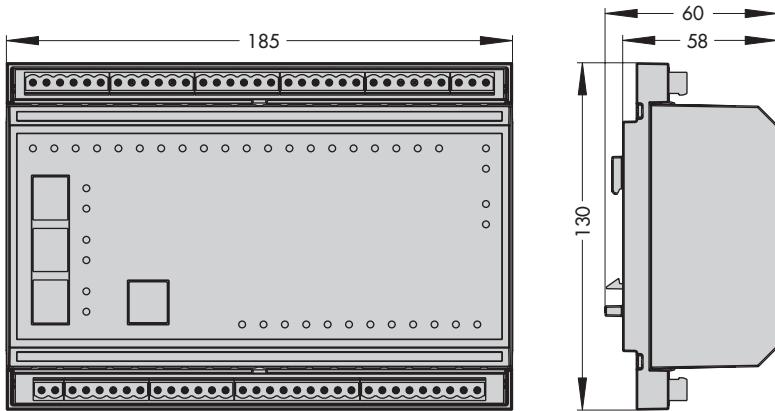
Installation dimensions of the TROVIS 6610 CPU Module
